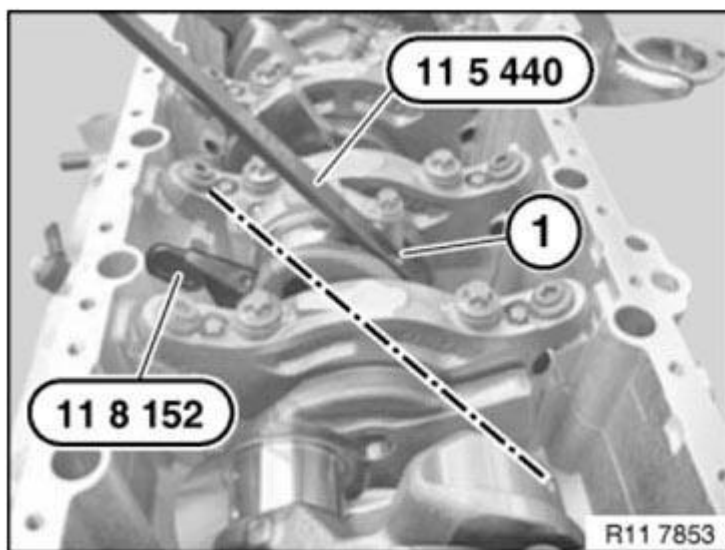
Removing Conrod With Piston From Cylinder Head Side
